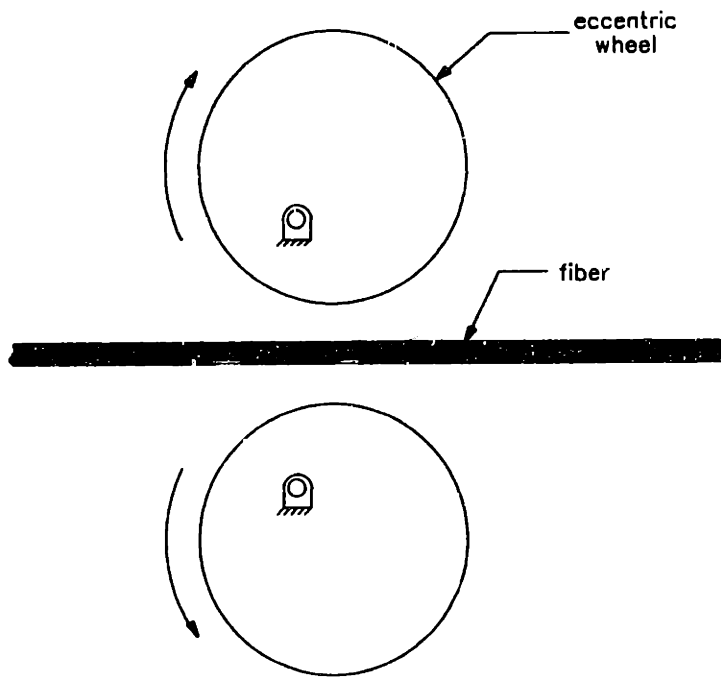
Eccentric clamping wheels rotating to clamp on the fiber.
